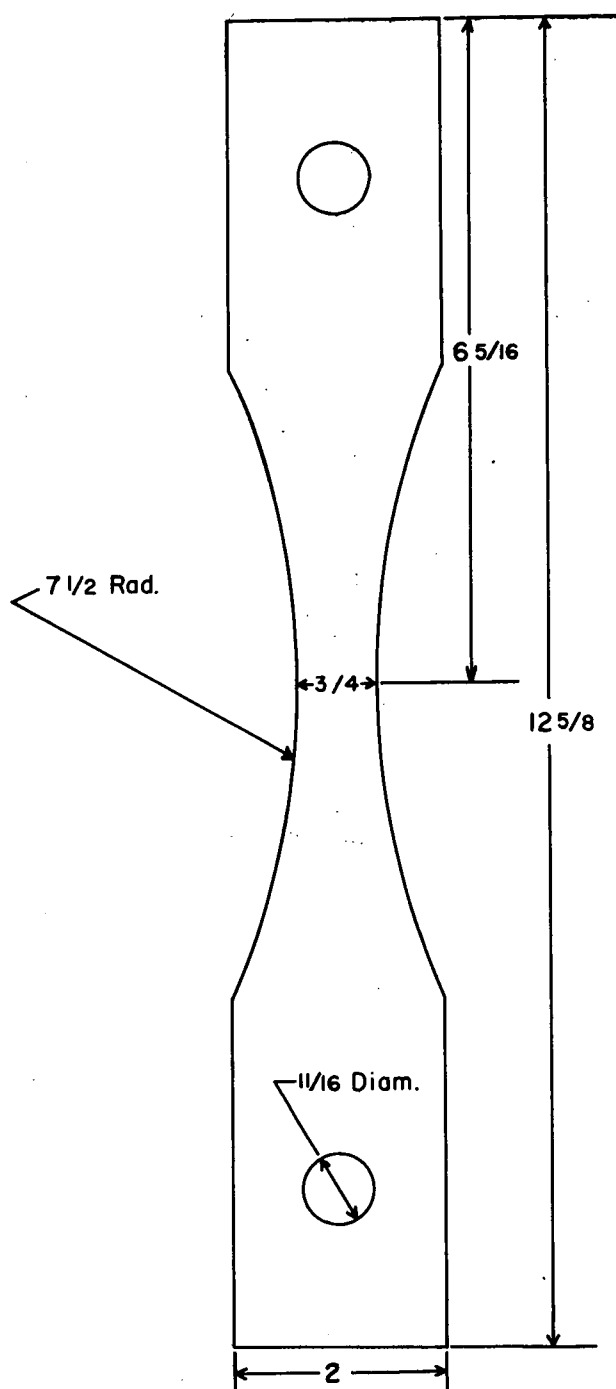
Configuration of fatigue-life specimens. All dimensions are in inches.
